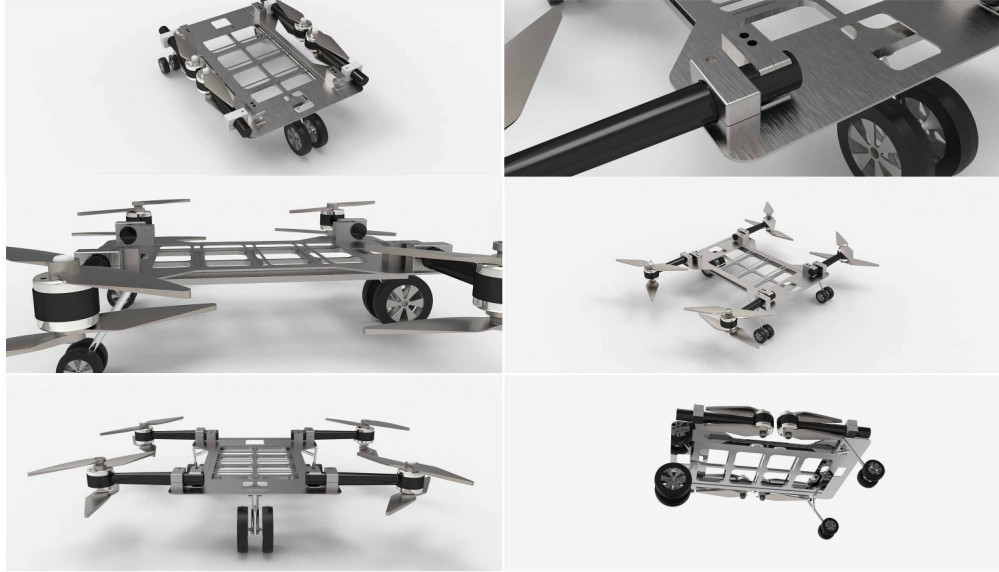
Main chassis design. It has the landing gears and rotors along with propellers in one single unit
